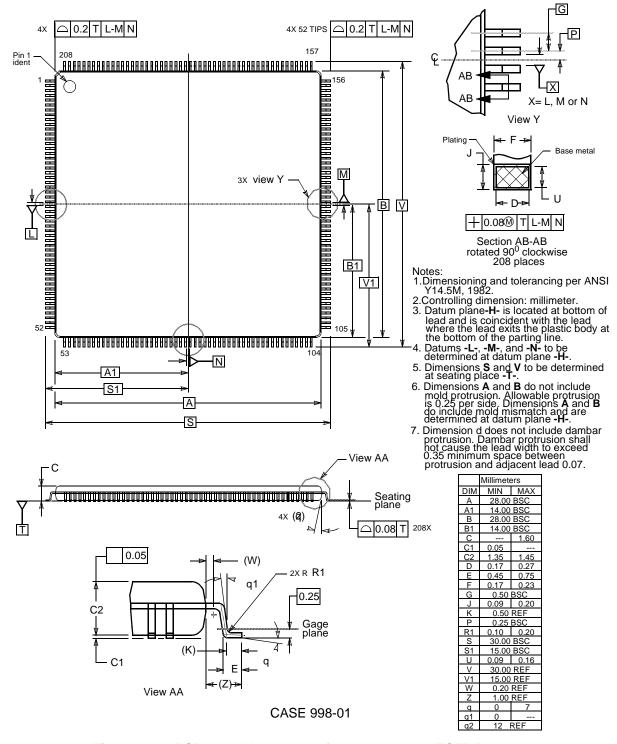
DSP56301 Mechanical Information, 208-pin TQFP Package
